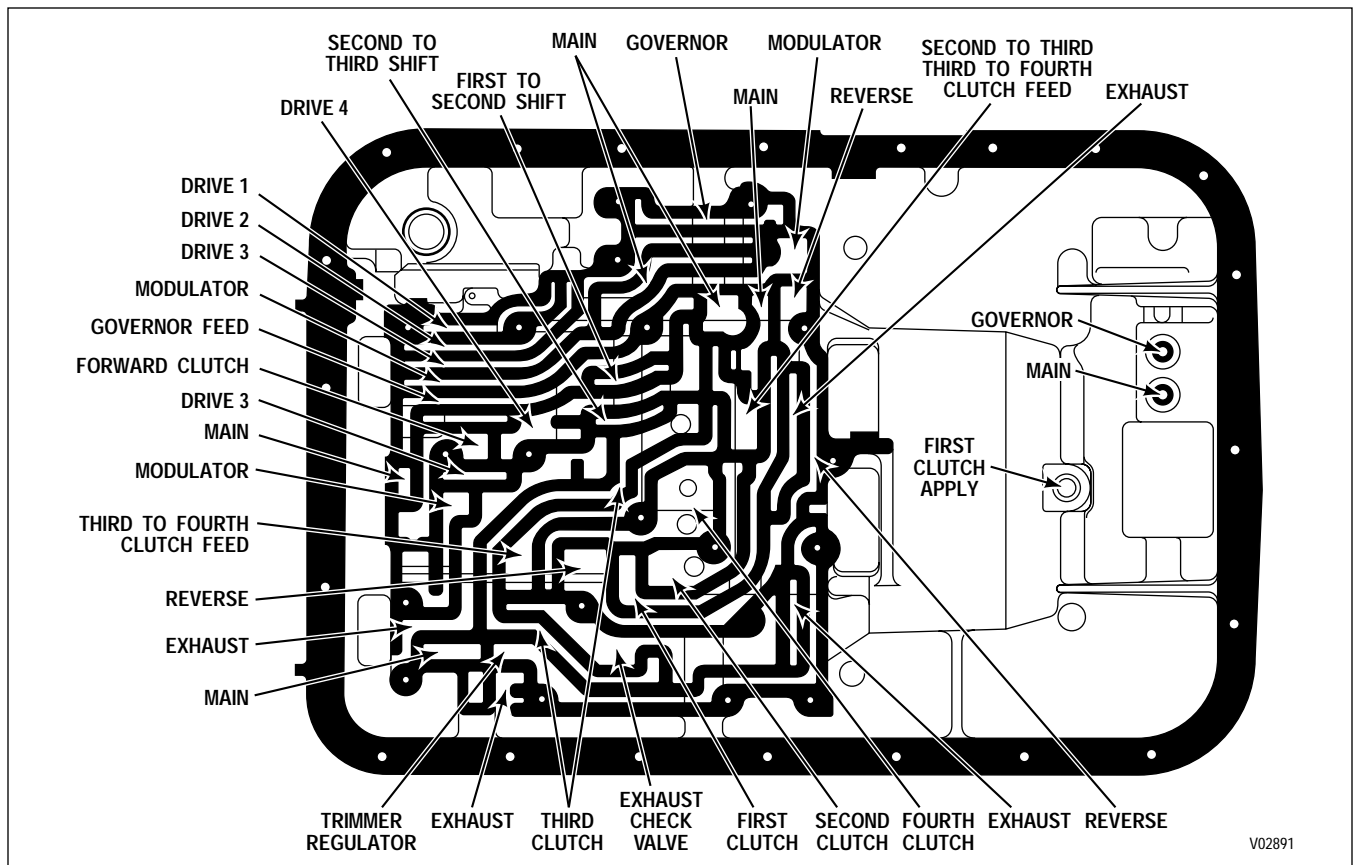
Transmission Housing — Main Control Valve Body Mounting Surface Tracks
